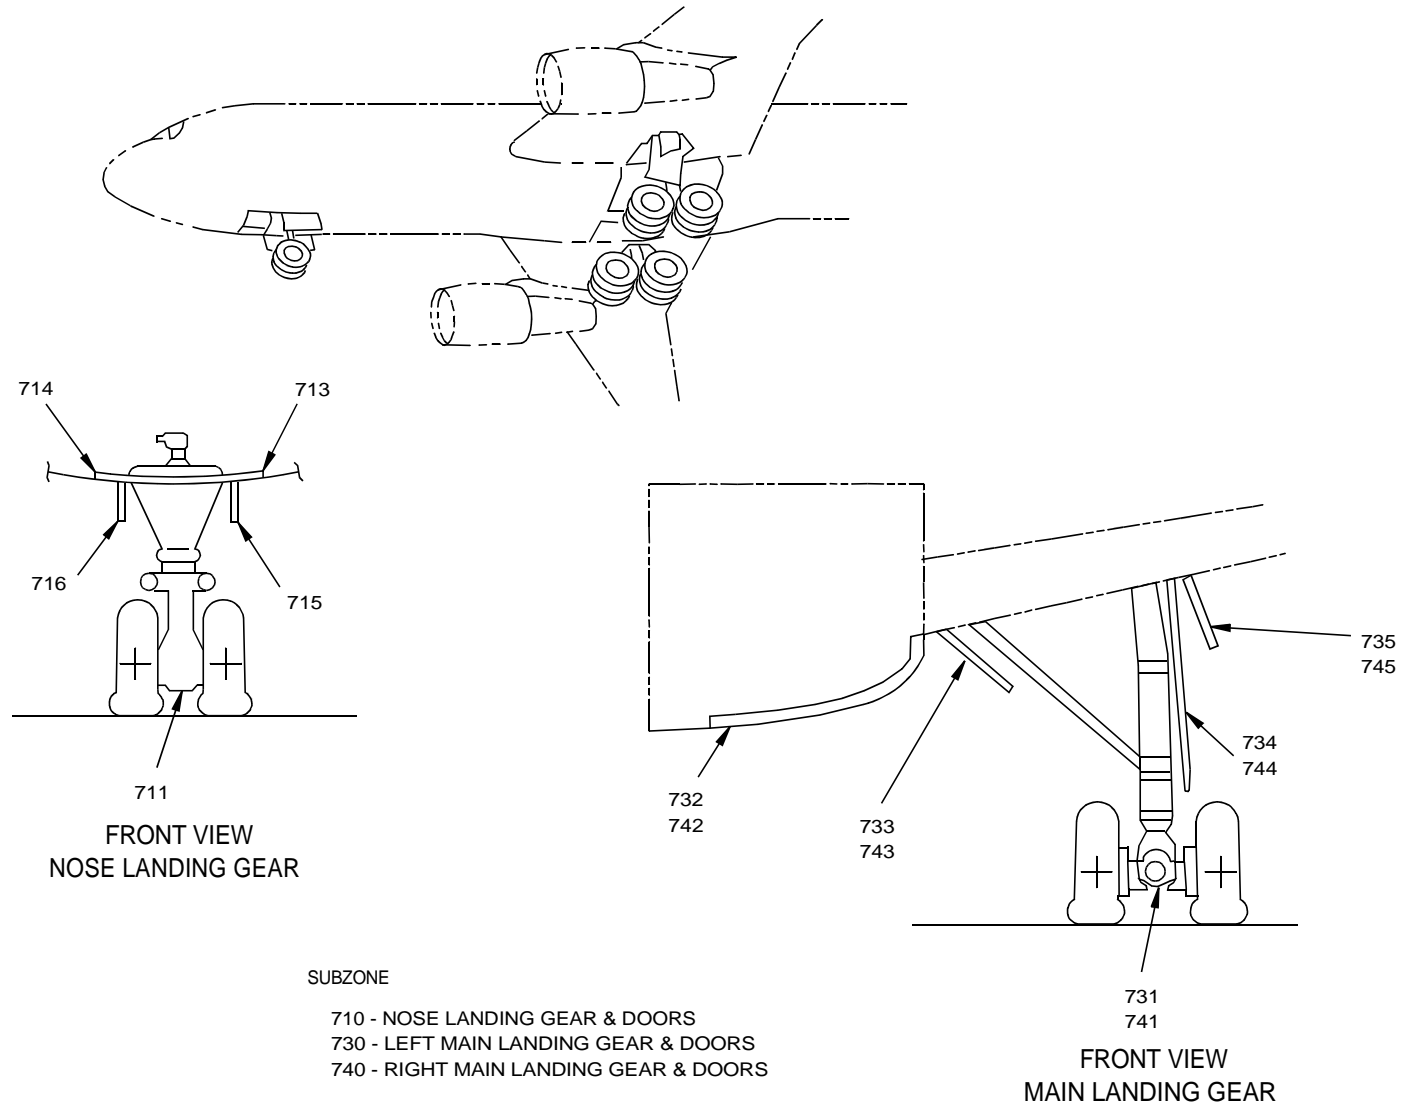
MAJOR ZONE 700 - LANDING GEAR & LANDING GEAR DOORS, 767-200/-300
